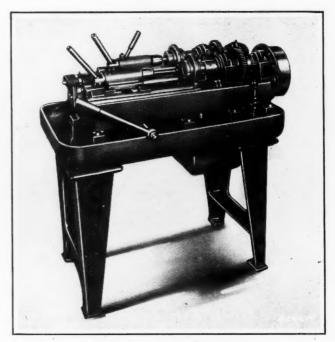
Model DS Threading Machine built by the Eastern Machine Screw Corporation
